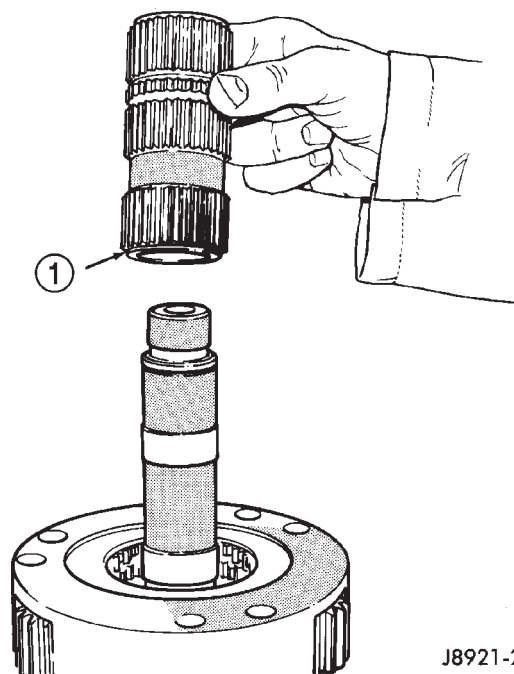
Intermediate Clutch Shaft Snap-Ring Removal
